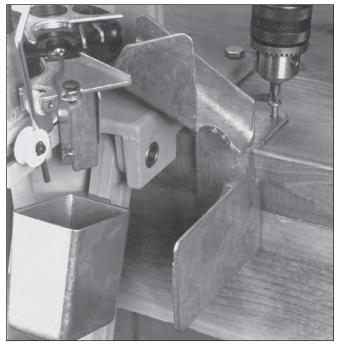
This photograph shows the correct mounting position of the cartridge collection bin bracket in relation to the machine.
